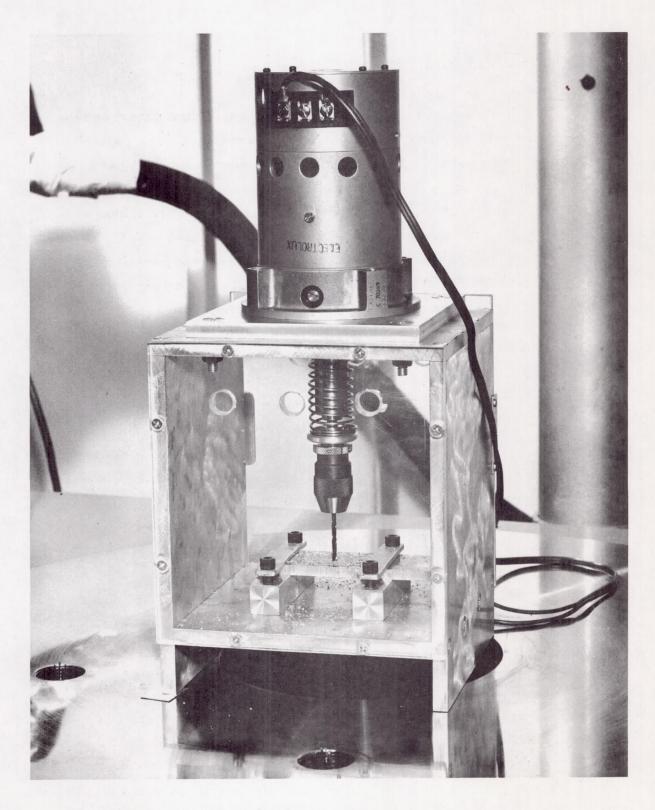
PHOTO OF DRILL FIXTURE
